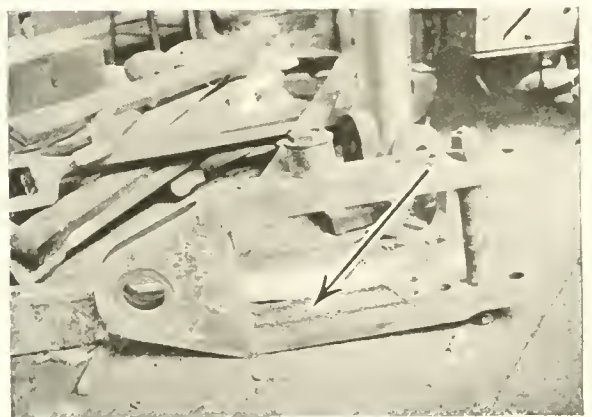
Worn Steel Casting—Locomotive Part—repaired by building up worn surface by arc welding.
